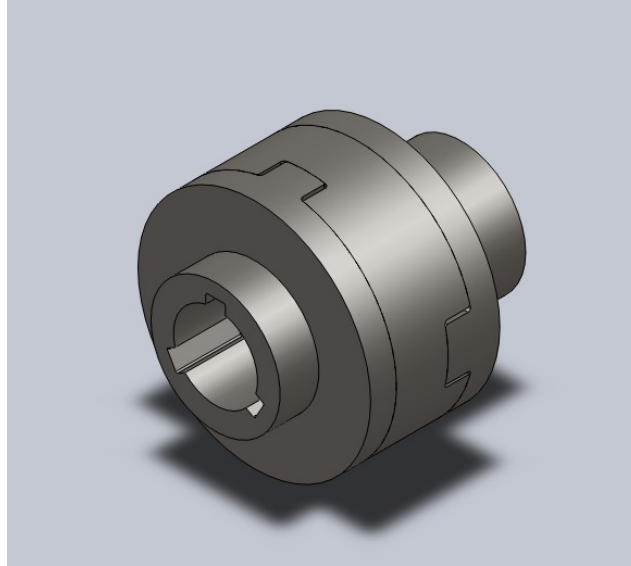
Torque Meter to Shaft Oldham Coupling Design
